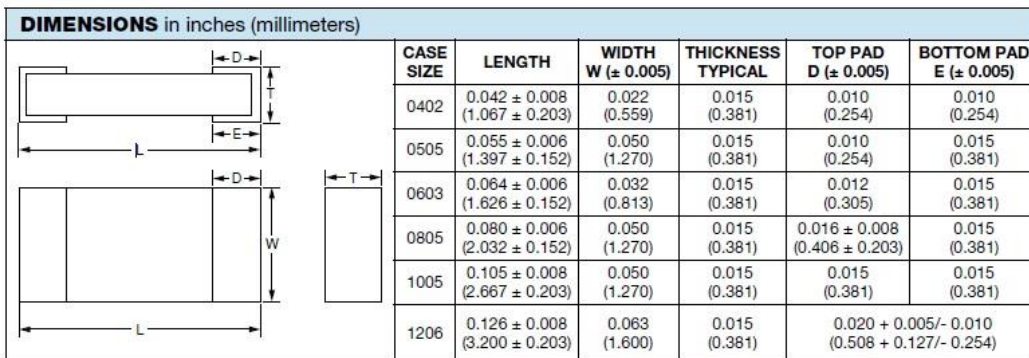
Physical parameters of the Vishay surface mount resistor used in the design of the WRCS system.
